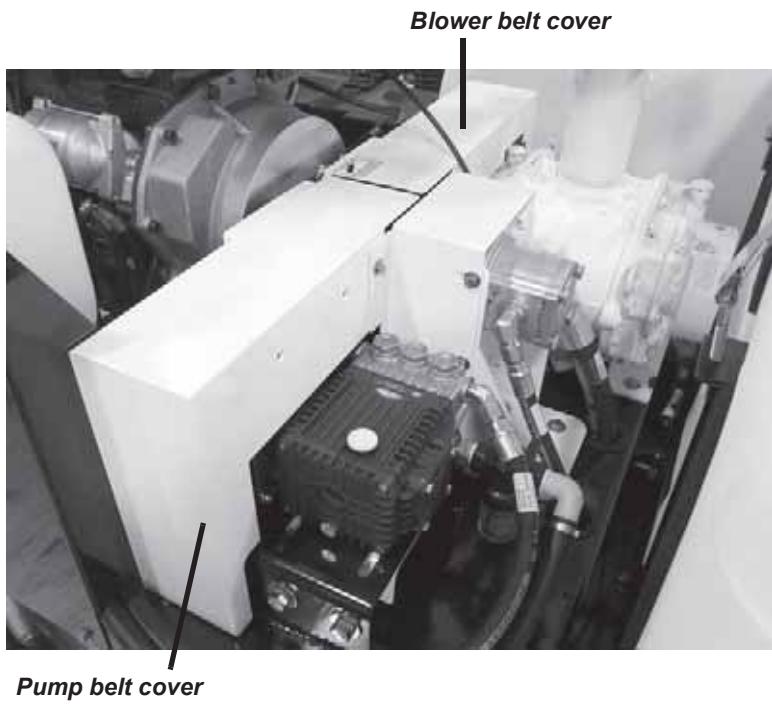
Remove the screws securing the blower belt cover to take the cover off and access the belts.
